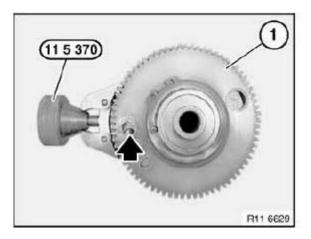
Identifying Special Tool 11 5 370 And Exhaust VANOS Gear Courtesy of BMW OF NORTH AMERICA, INC.
